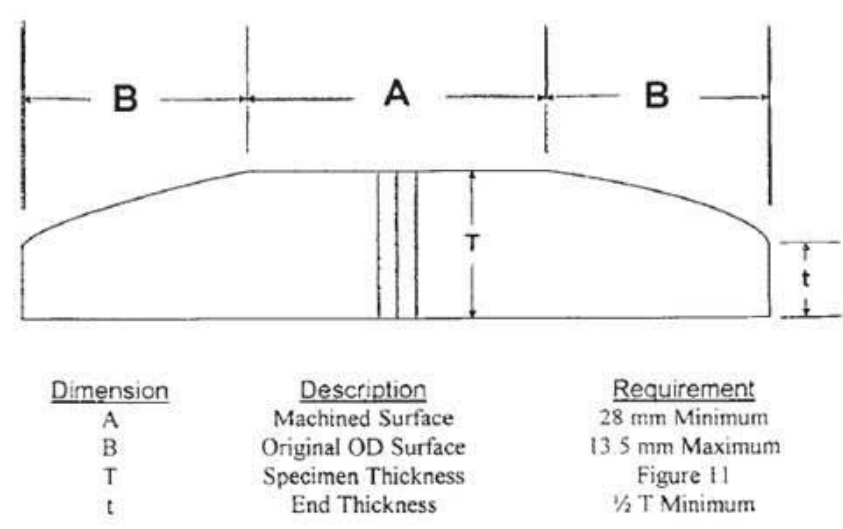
Tubular impact specimen containing original outer diameter surface [90]
